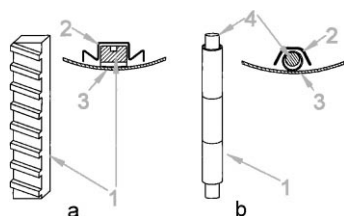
Comb wiper by GEA Canzler, Dueren (a) and tube wiper by UIC, Alzenau (b). 1 — wiping element, 2 — bearing channel, 3 — evaporating cylinder, 4 — bearing rod.
